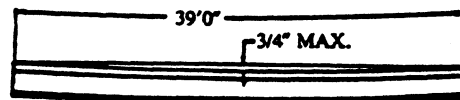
Side Elevation of Rail Uniform Upsweep Tolerance per Section 13.2
